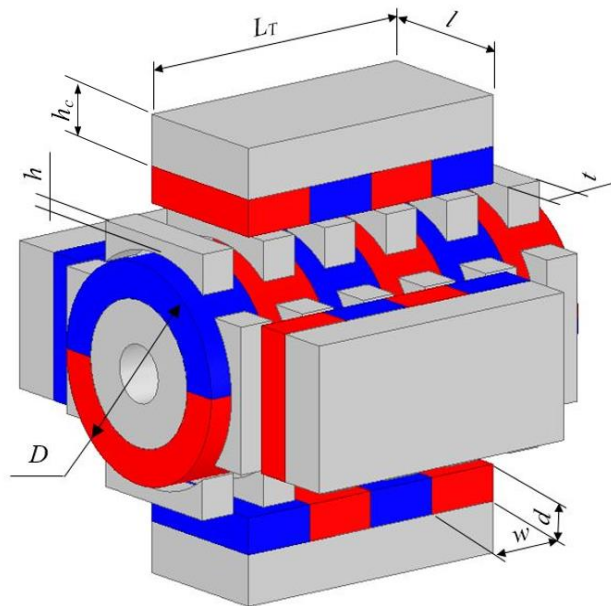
7. A rotary-to-linear magnetic gear with 8 peripheral rotor poles.
